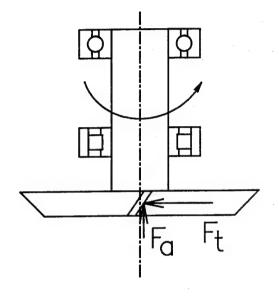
HELICAL—PINION GEAR—MESH FORCES
